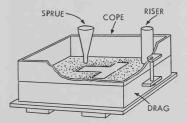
Cope set on drag with riser pin and sprue pin in place.
